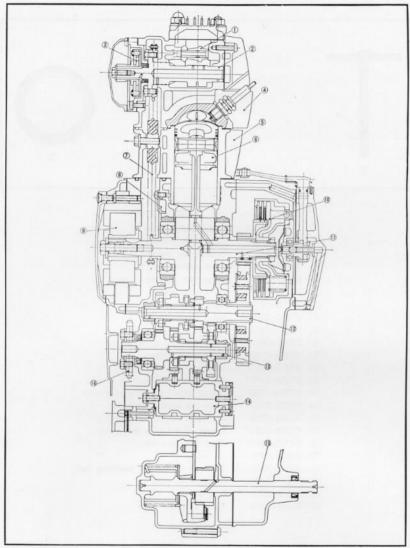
Engine assembly diagram (S 90, CL 90, CL 90 L)
